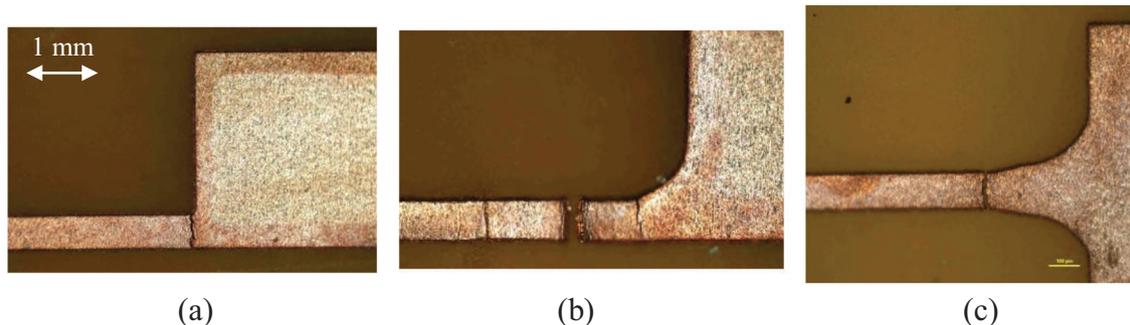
Postbending failure points on 150 μm wide copper tracks a) with no fillet to the bond pads, b) filleted at the edge of the bond pad, and c) filleted at the center of the bond pads.
